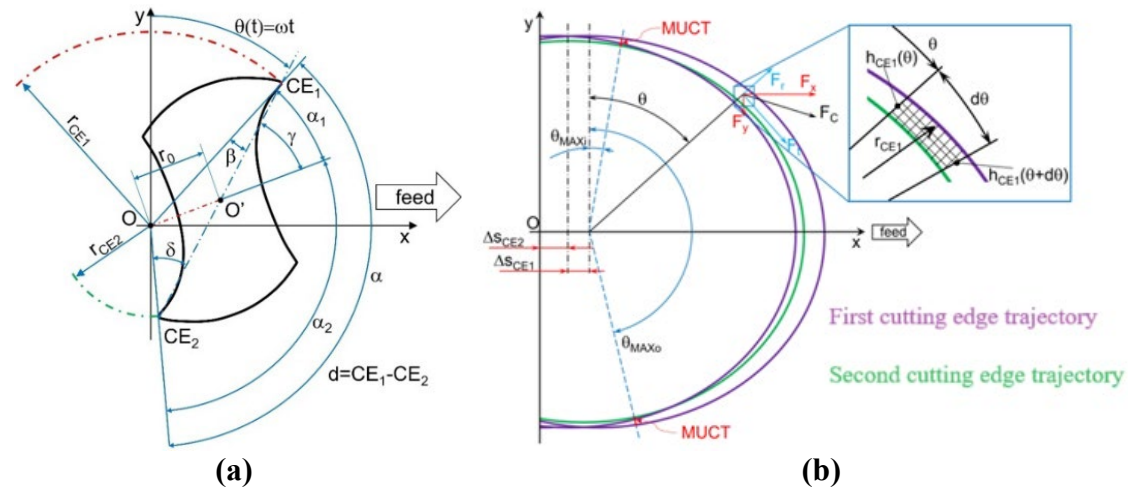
(a) Geometrical representation of tool run-out (b) and representation of tool edge trajectories and force components.
